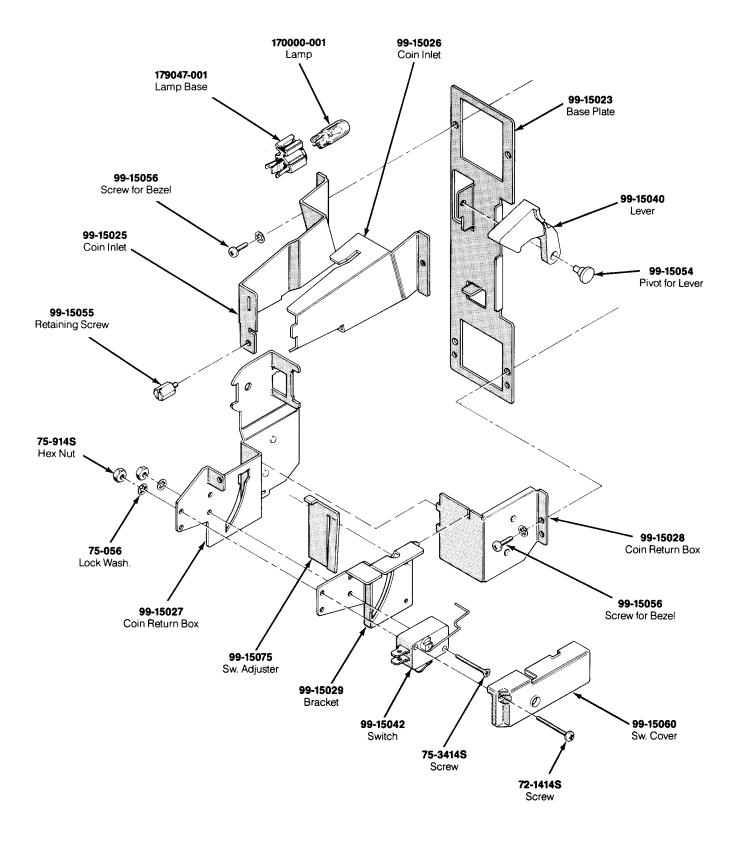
Coin Controls, Inc. Coin Door Assembly 171034-xxx A
